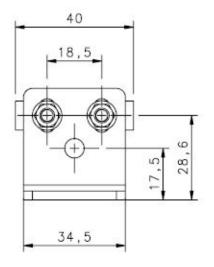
Dimensions of SLG4 B2/3/4-XXXX
